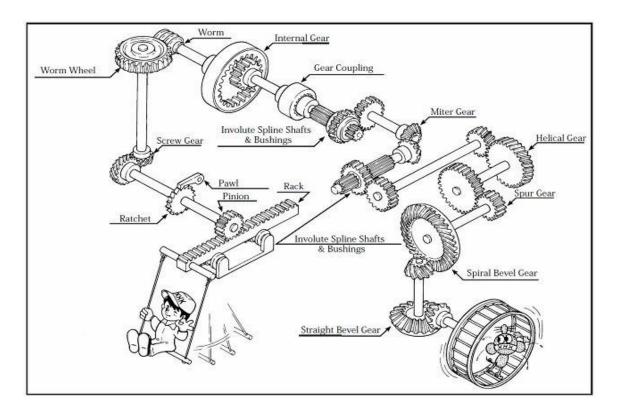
An overview of gears (Important Gear Terminology and Gear Nomenclature) [14]
